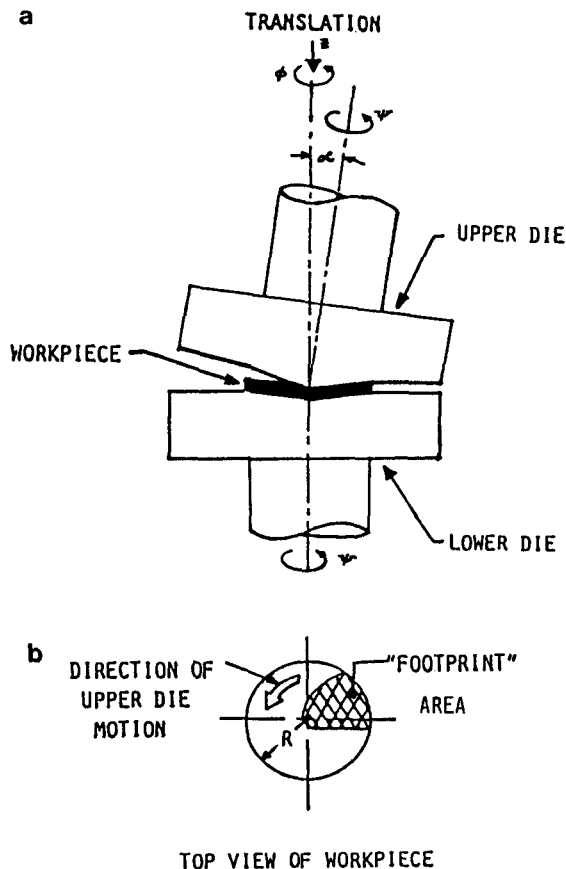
A schematic of the rotary forging process: (a) die arrangements and kinematics, and (b) top view of the workpiece showing the area of die-workpiece contact (footprint area).
